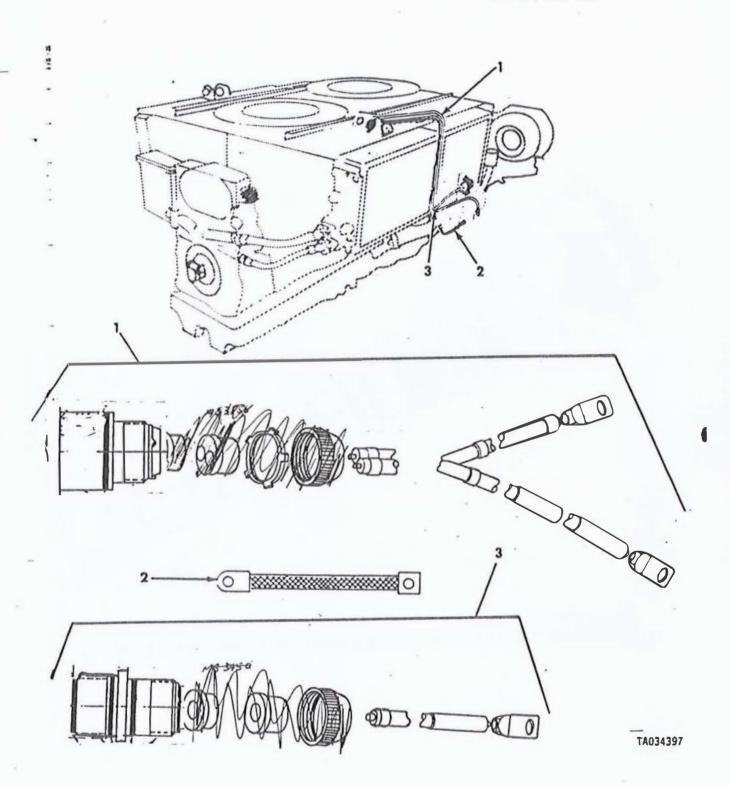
Generator cables, blower motor harness, and associated parts (Models AVDS-1790-2D and AVDS-1790-2DA).
